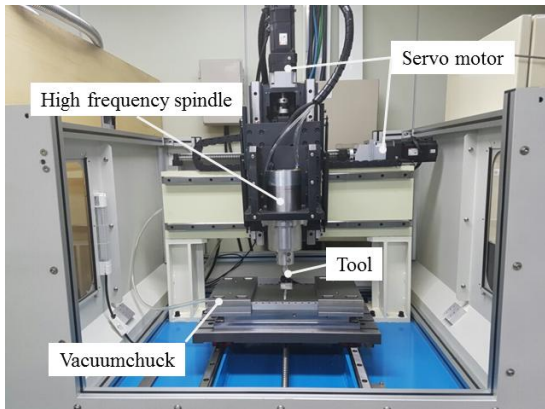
Photo of μ -friction stir welding machine^[9]
